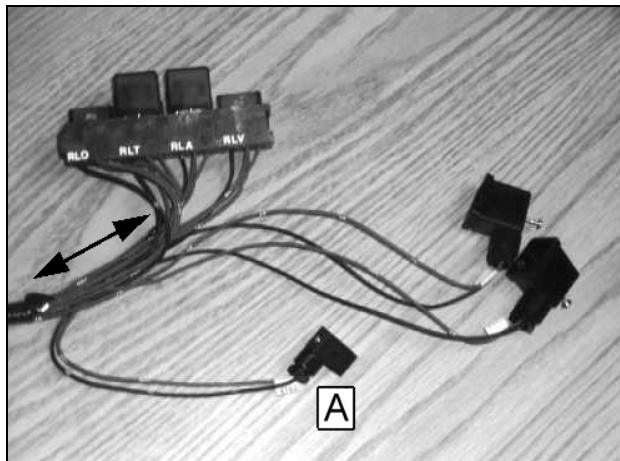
RELEASING OF THE CONNECTION JOINTS.
